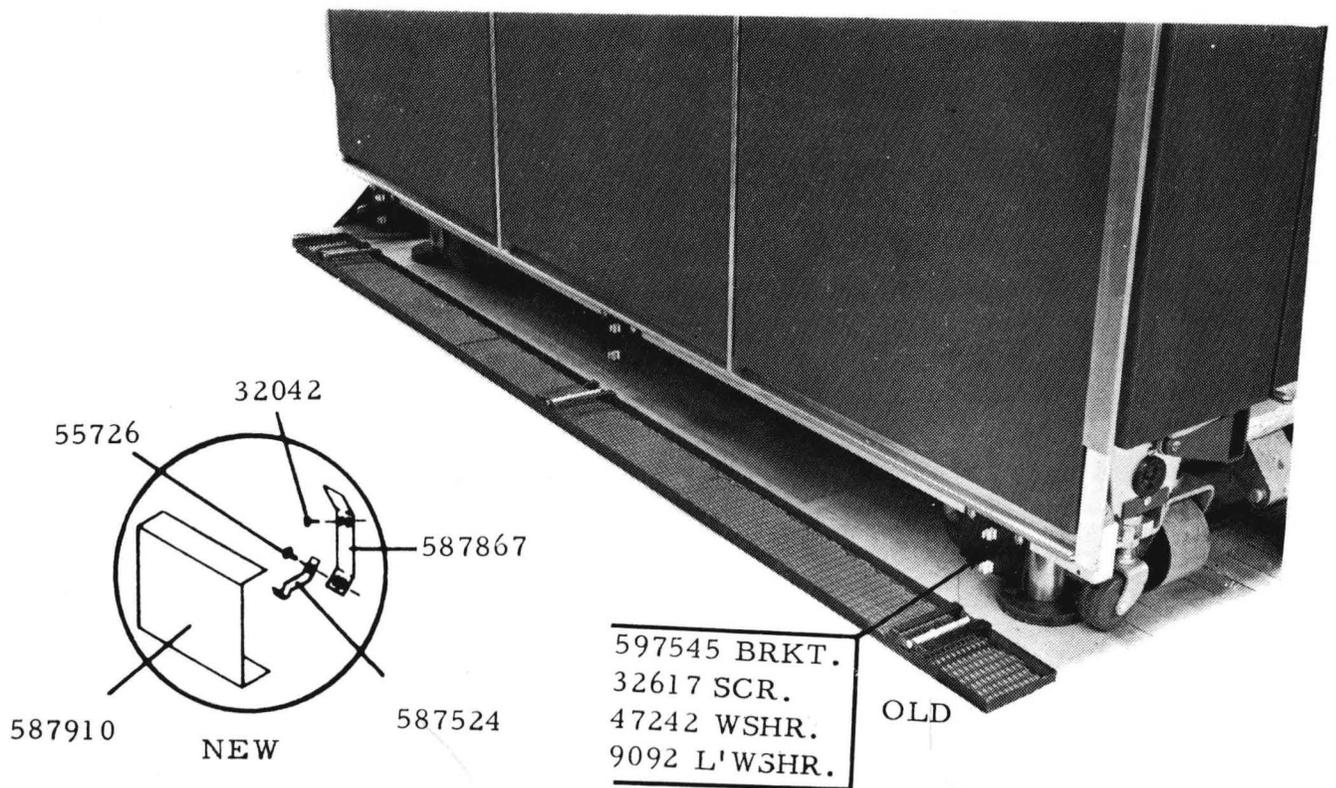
KICKPLATE MOUNTING - SIDES OF SMS FRAMES
